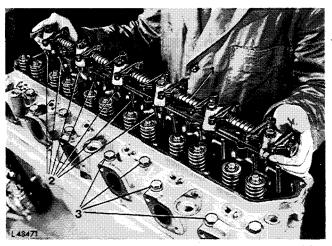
Removal of Rocker Arm Shaft Assembly 1 Rocker arm shaft 3 Cylinder head cap screws 2 Push rods
